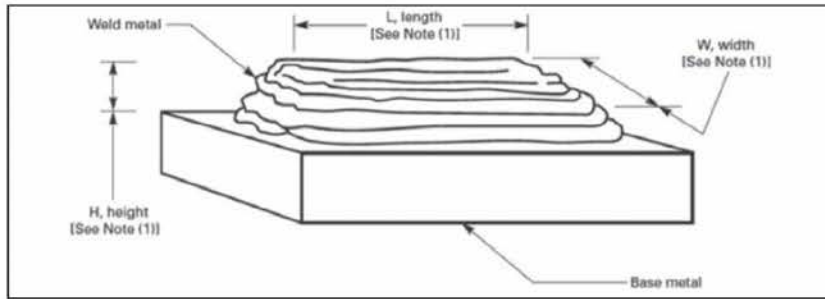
Pad for chemical analysis of undiluted weld metal (from SFA 5.1).
